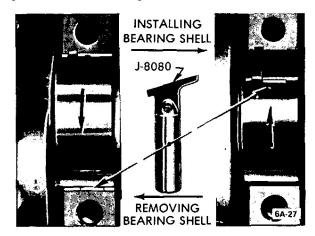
A-27 Removing and Installing Crankshaft Bearing Upper Shell
